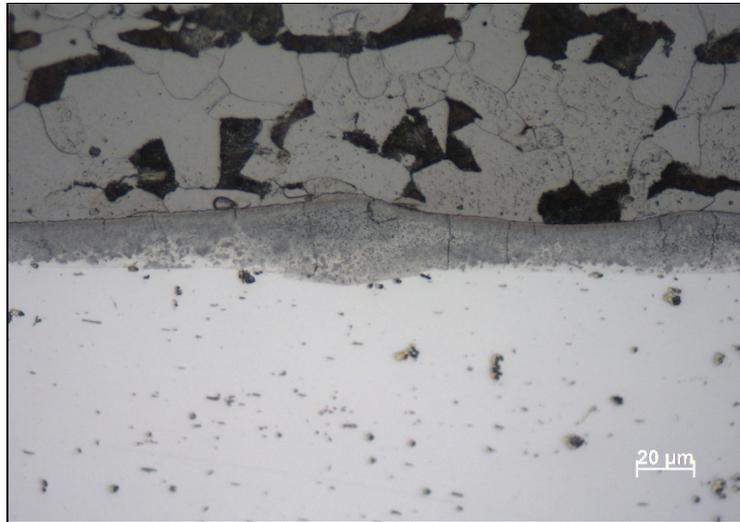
Vertical cracks in the intermetallic layer of an aluminum-steel weld
